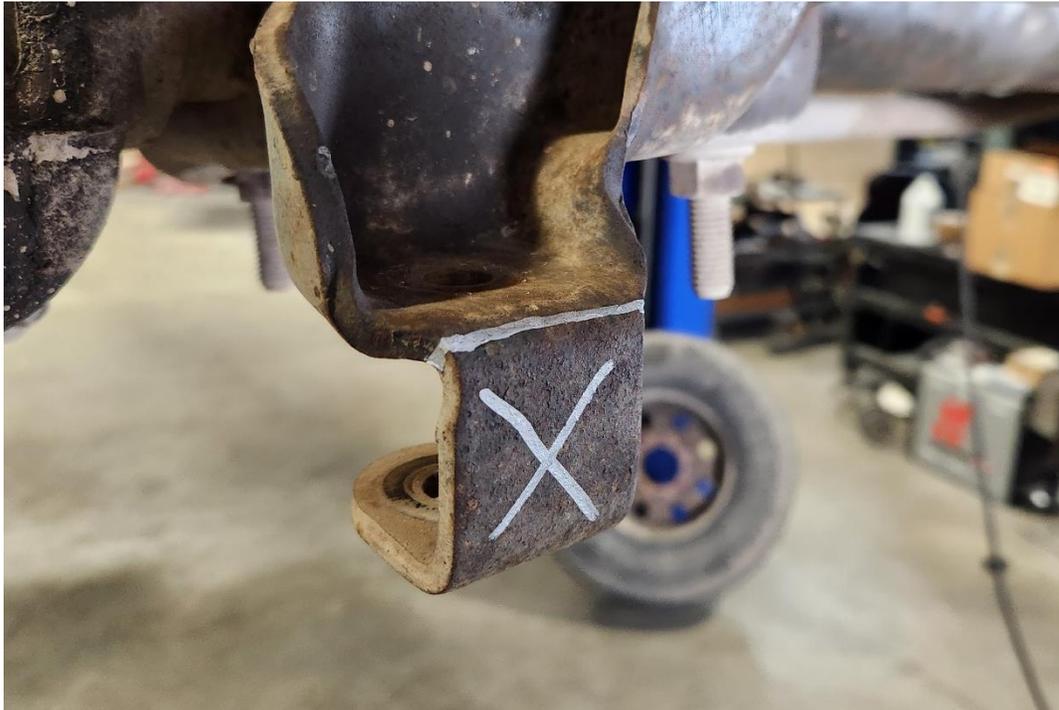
Lower Portion of Stock Steering Stabilizer Mount to be Removed to Mount Through Shaft Steering Stabilizers
